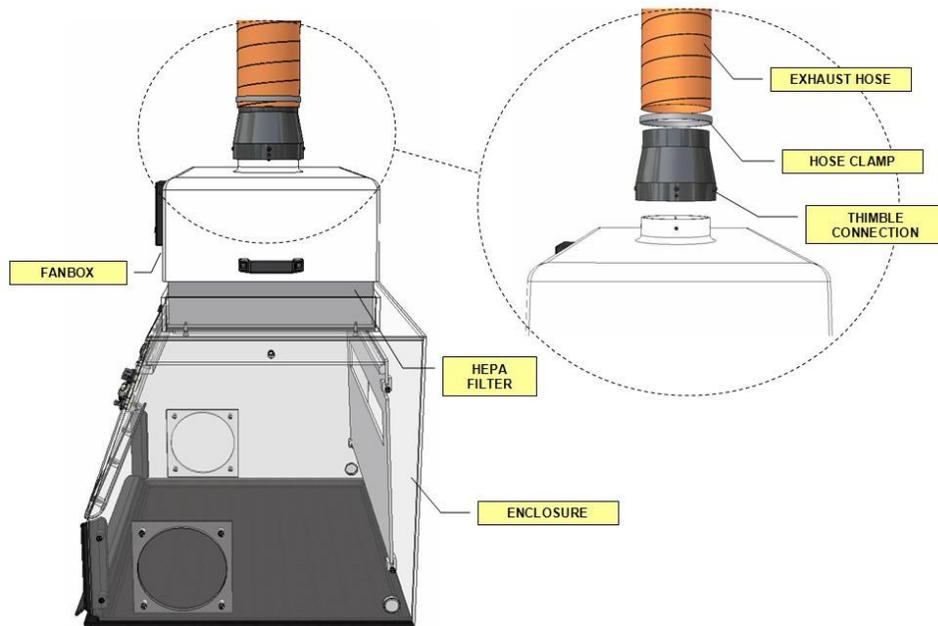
Thimble Connection for Remote Fan Housing
